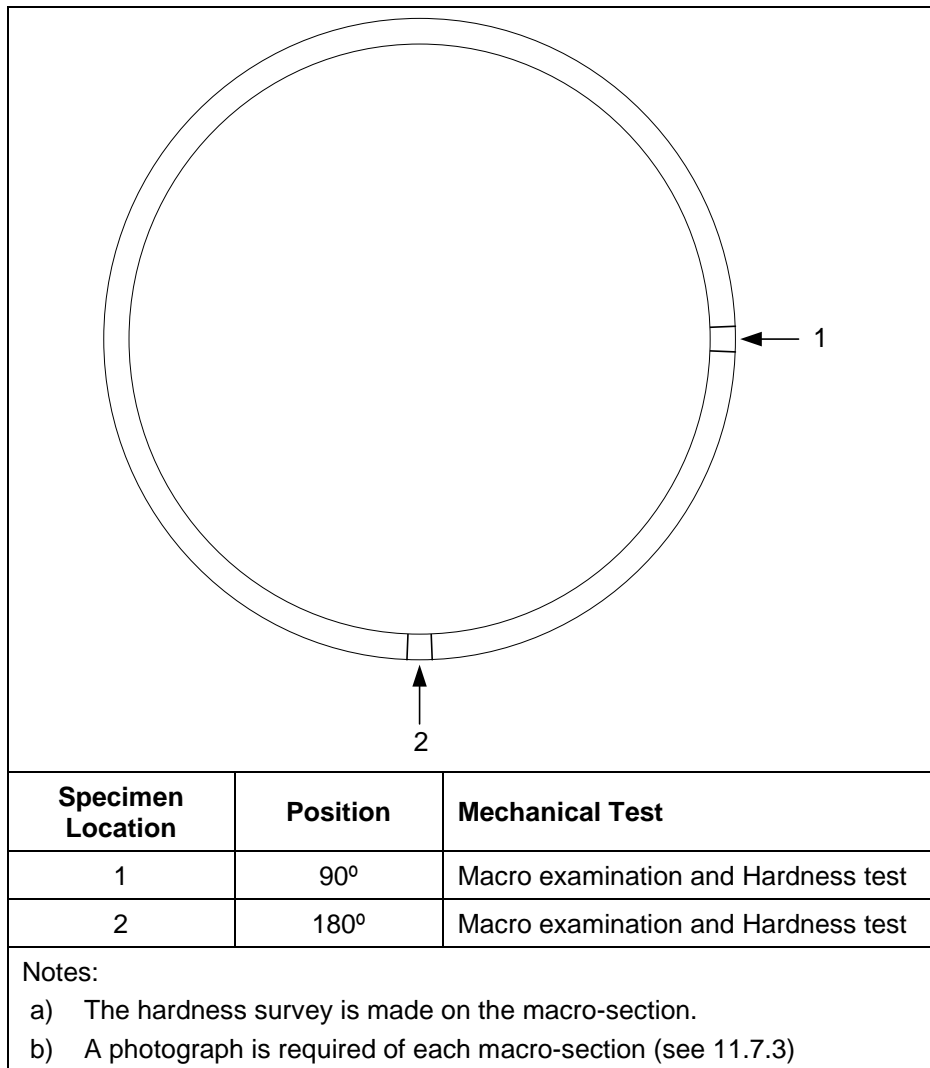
Locations for Test Specimens for Butt Welds ≤ 114.3 mm OD.
